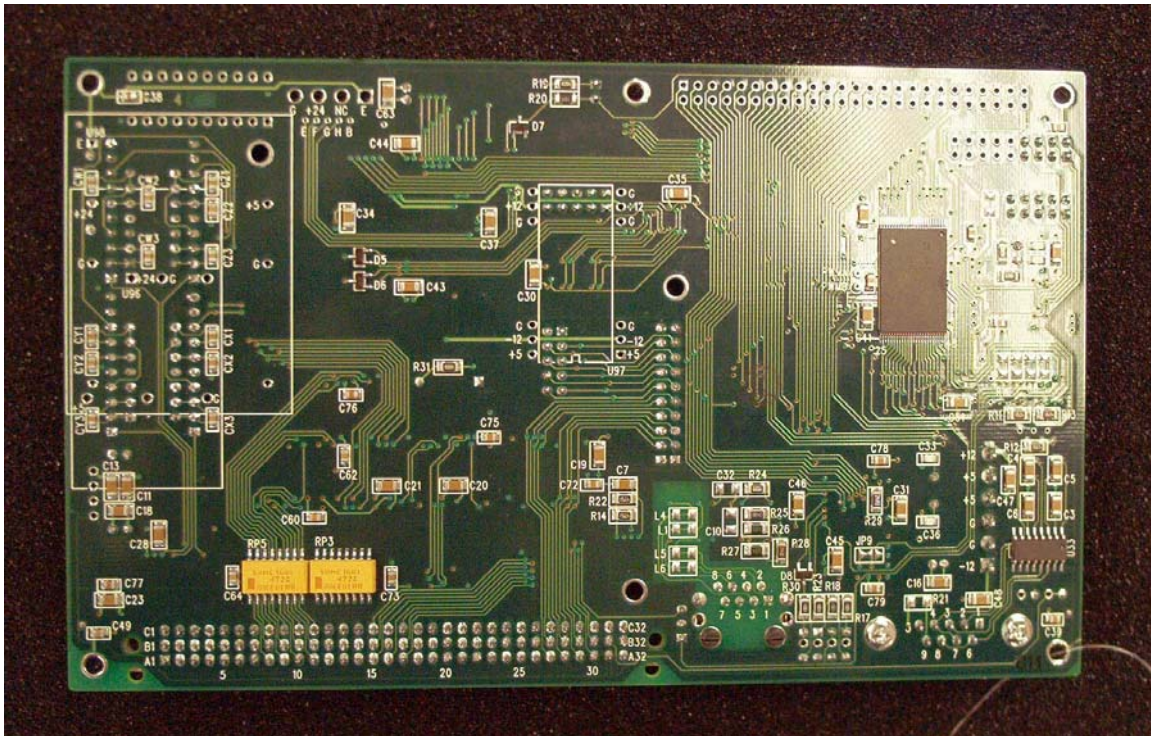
Galil DMC-2143-V-UP-VP (bottom view) with 96-pin connector silkscreen (lower left)
